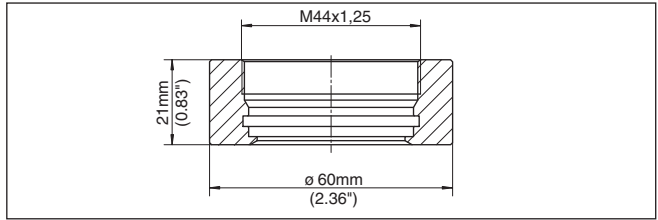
Dimensions of welded socket, M44 x 1.25 - VEGABAR 82, 83
